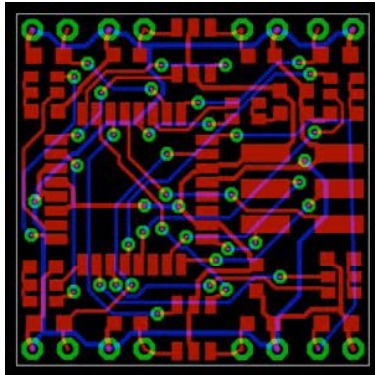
Circuit board layout. Circuit board is 20mm on an edge.²
